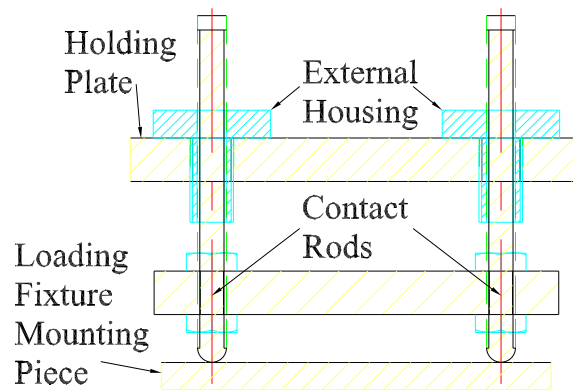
Leveling Fixture: Thread Differential and Contact Rods
